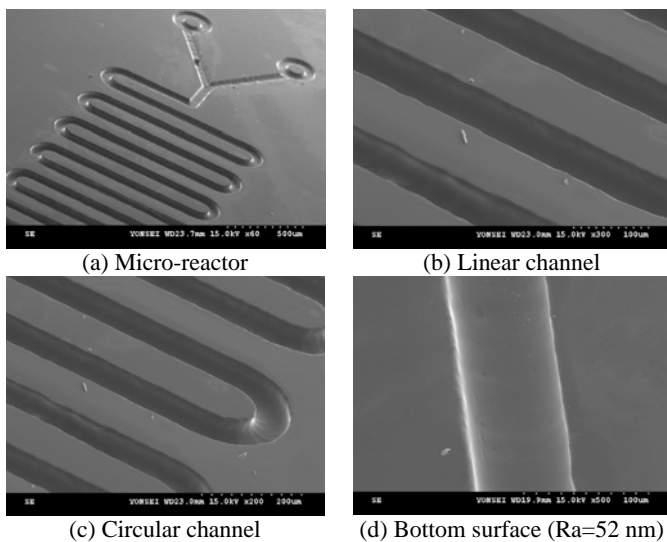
Prototype of micro-reactor fabricated by hybrid ECDM process using PCD tool
